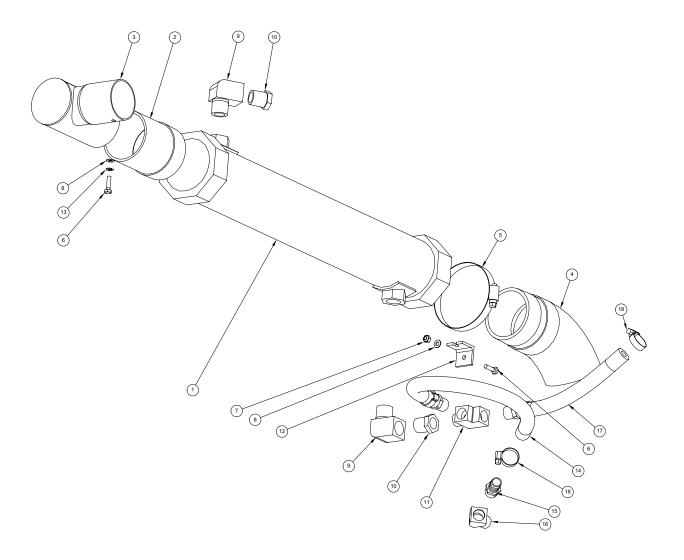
Dual Heat Exchanger Assembly D-3090 Rev B
